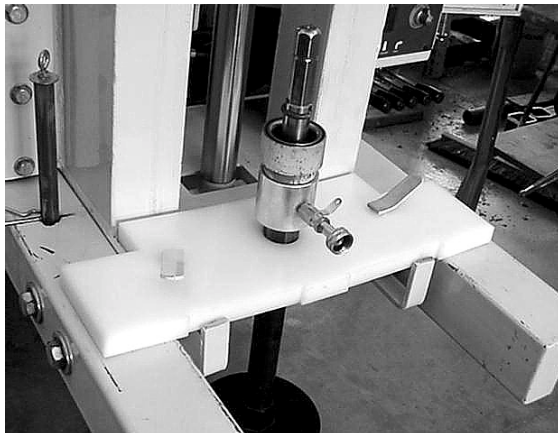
Position support plate with end cutouts facing the machine on 5410 units.
